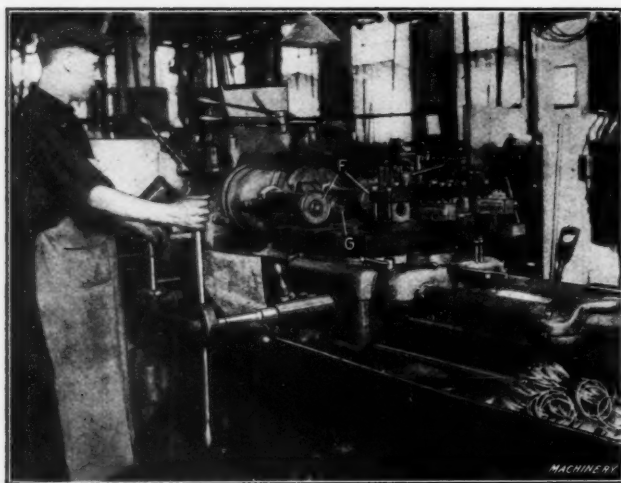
Machining Piston Rings on the Double-spindle, Flat Turret Lathe
